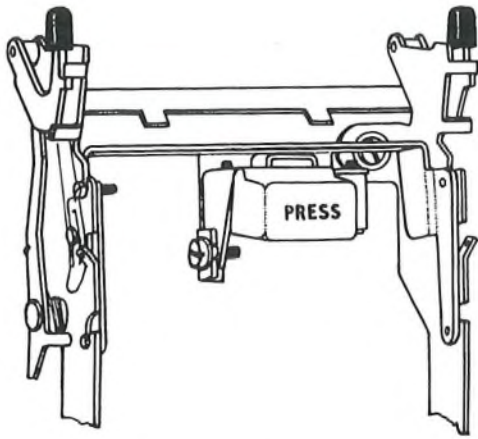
SINGLE-PUSH-BUTTON UNIT
